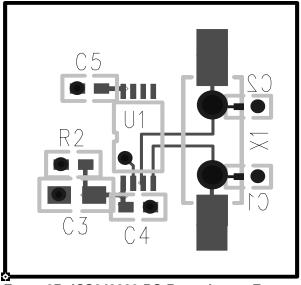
B. ICS843022 PC BOARD LAYOUT EXAMPLE
